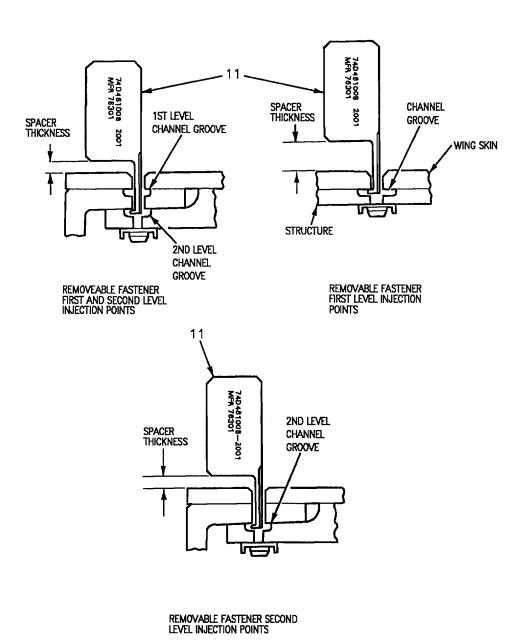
Sealant Injection Fitting and Adapter Installation (Sheet 1)
